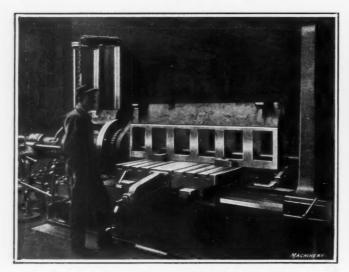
Lucas Horizontal Milling and Boring Machine boring Bearing for Six-cylinder, 126-horsepower Crank-cases
